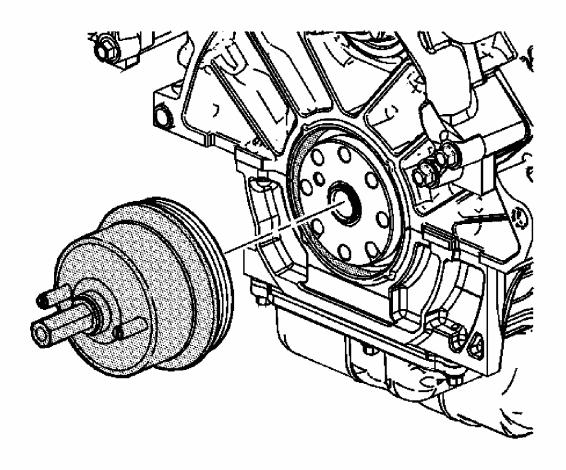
Threading J 45930-A Amounting Bolts Into Crankshaft Courtesy of GENERAL MOTORS CORP.
